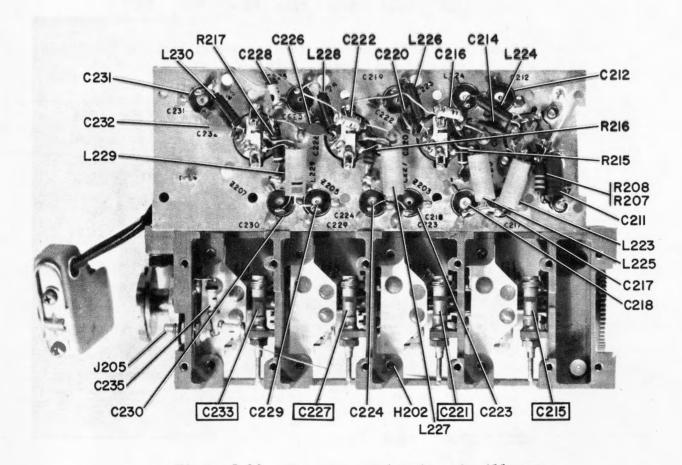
Frequency Multiplier-Oscillator, Chassis, Bottom View
